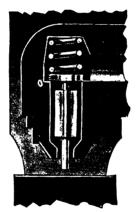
The details of the nozzle and seat (Courtesy of: Modern Engineering Company)
